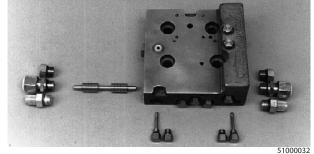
Multi-function Block With PCOR Defeat Spool Components
